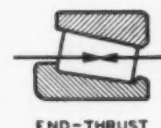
illustrates in diagrammatic form the principles under which the taper roller bearing takes any combination of thrust and radial loads. A straight bearing is illus-
